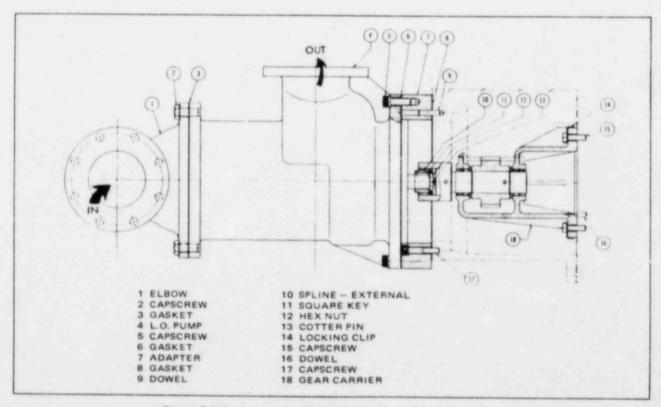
K-1. Lubricating Oil Pump and Gear Carrier Assembly
